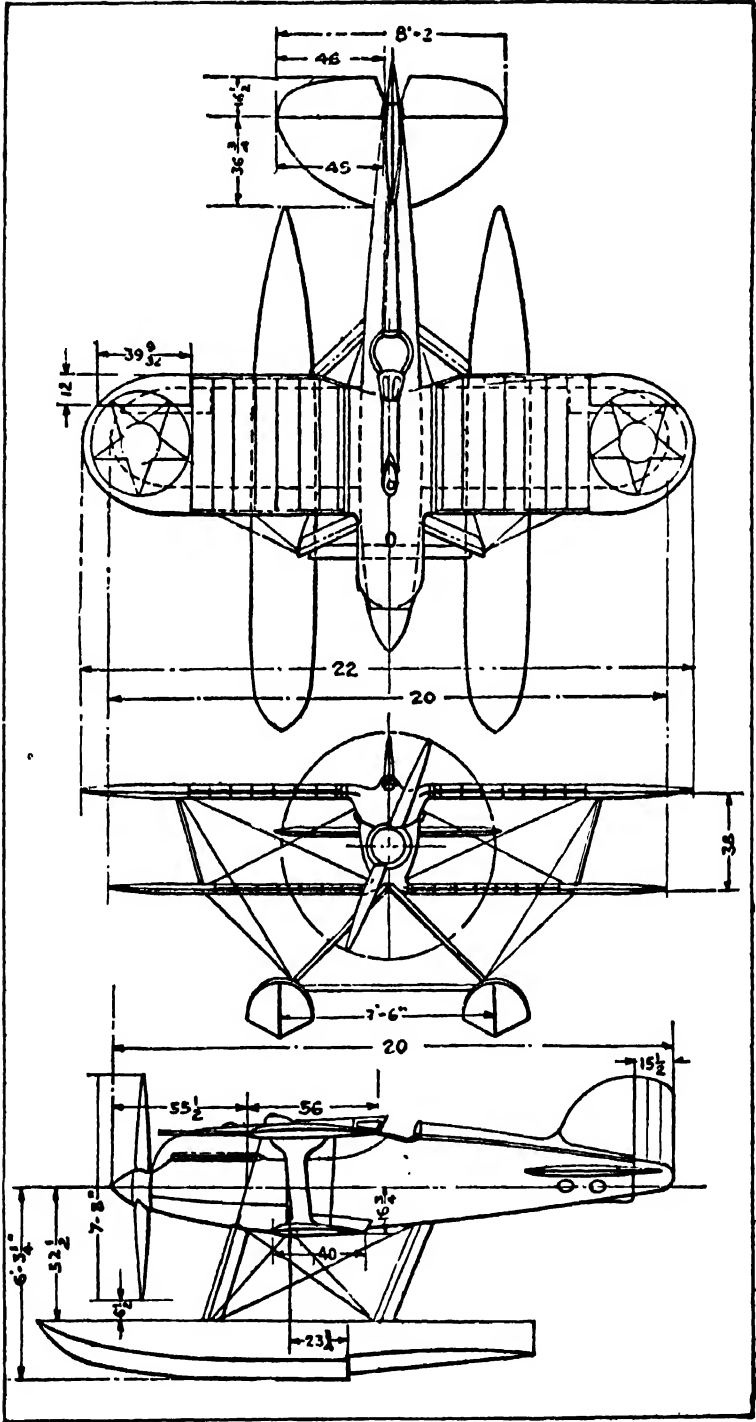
General Plan and Elevation Drawings of Curtiss Twin Pontoon Seaplane Racing Biplane.
